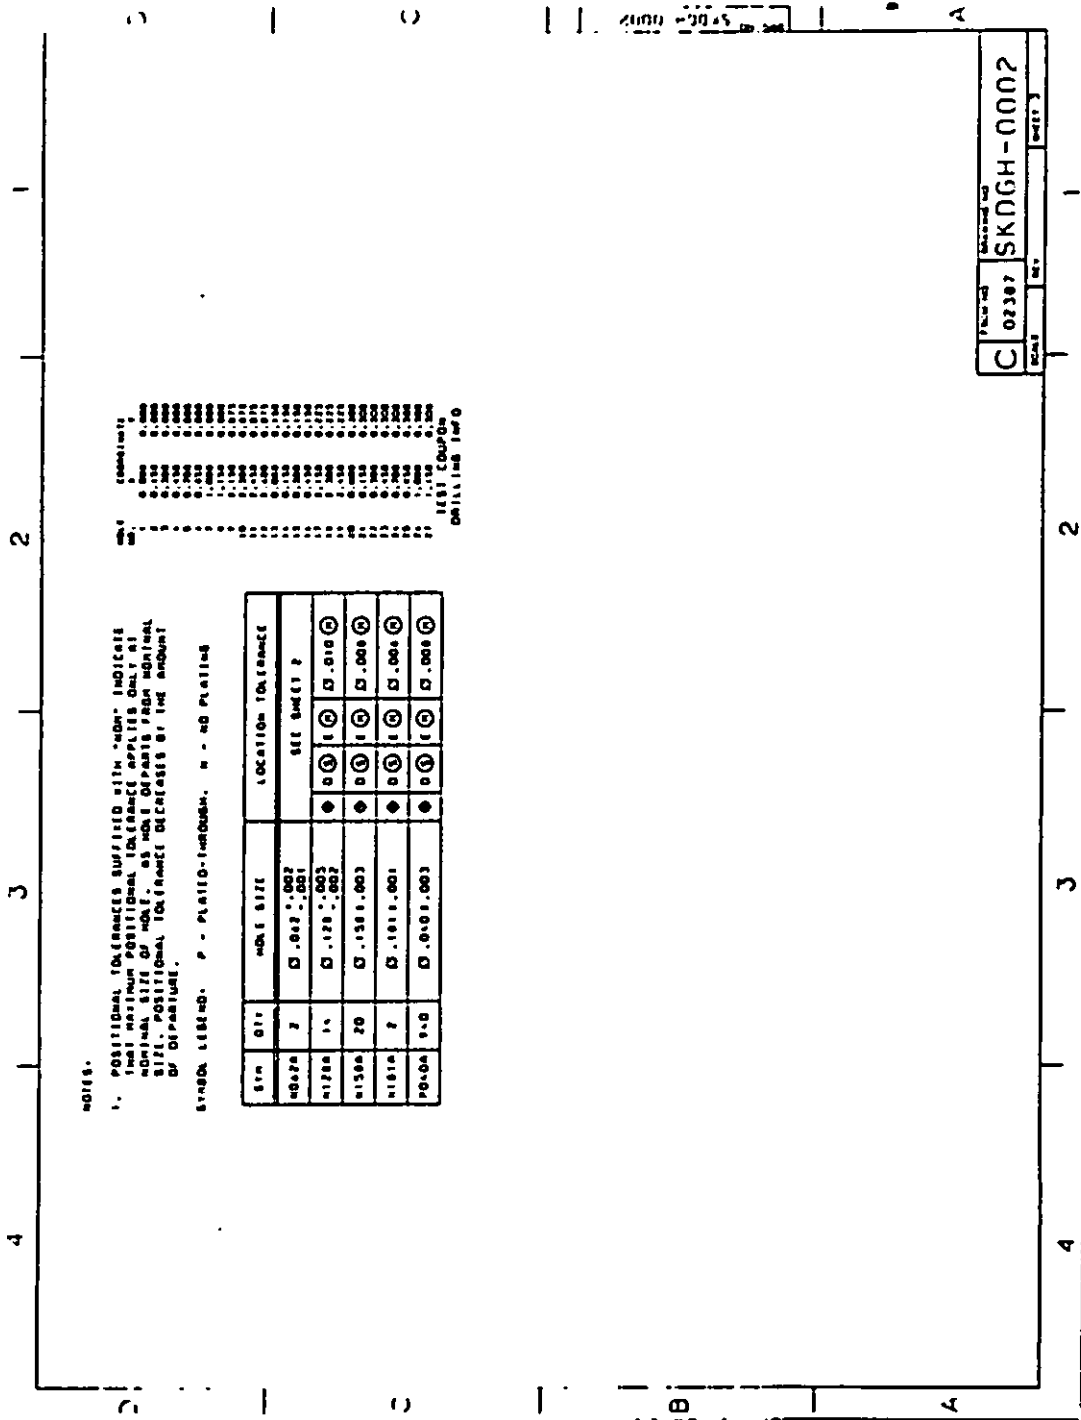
Double sided board, qualification inspection sample - Continued.
